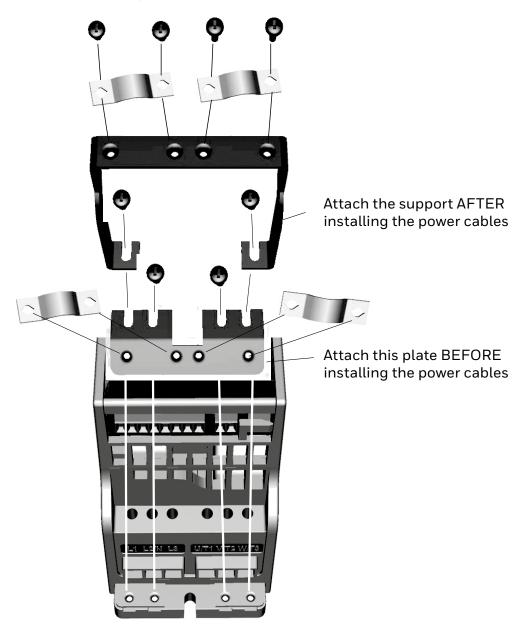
Mount the PE-plate and API cable support, MI1 - MI3
